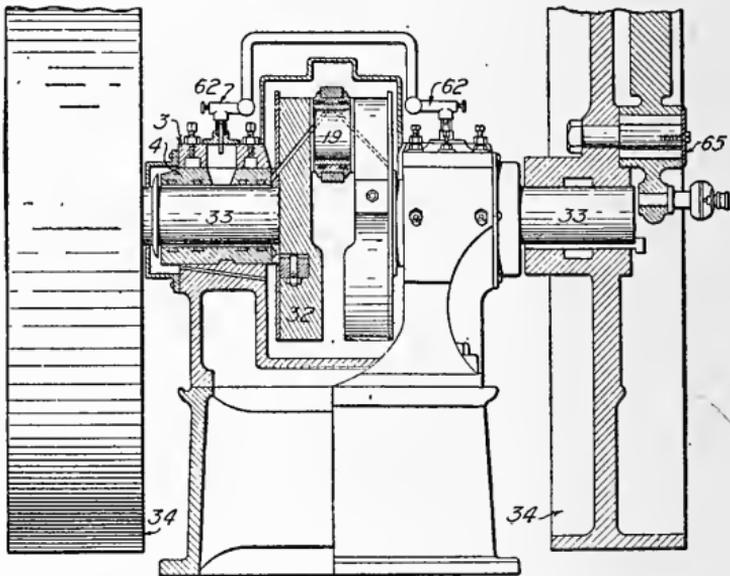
End Elevation and Part Section of Modern Simple Engine
